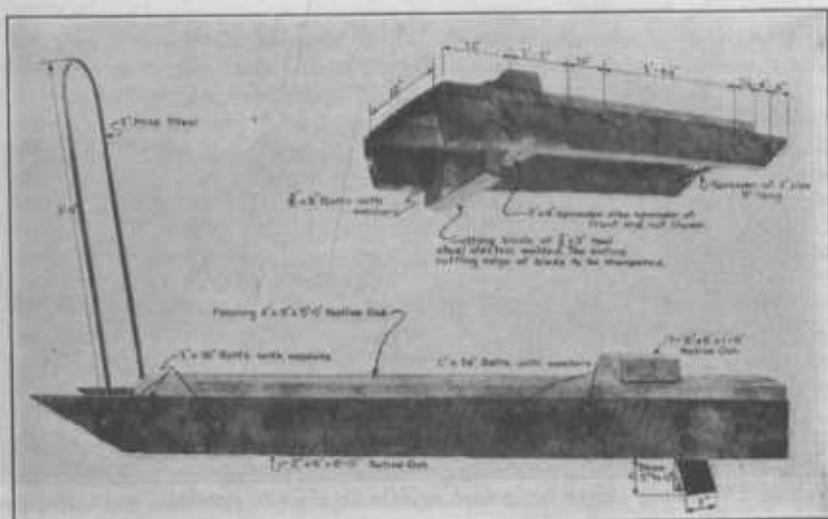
With this simple implement sod strips can be cut quickly and cheaply.
